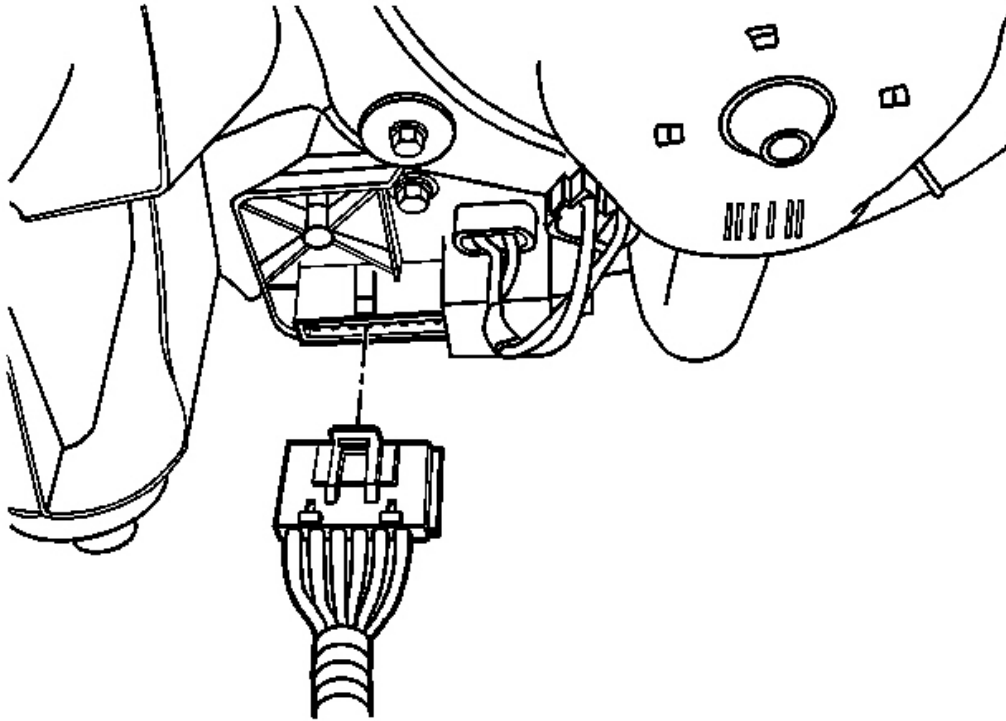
Blower Motor Resistor & Wiring Harness Electrical Connector
